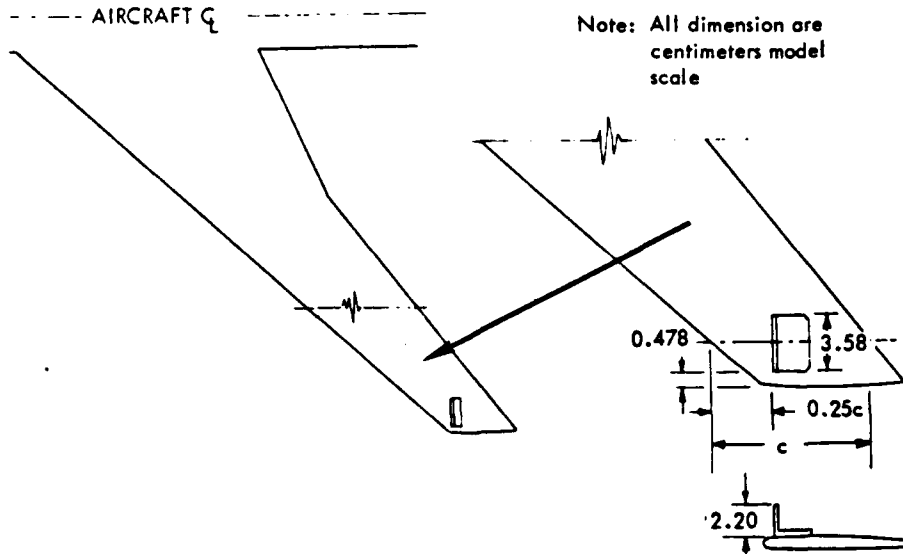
Wingtip Mounted Spoiler [Ref. 27].
